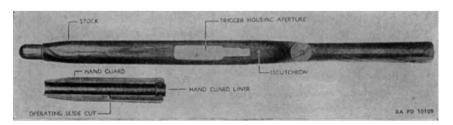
Stock and hand guard — carbine, cal. .30, Ml,
